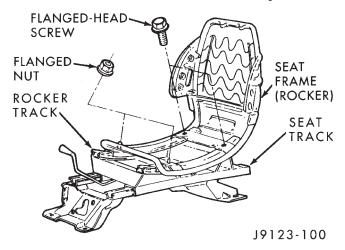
Manual Seat Frame (Rocker) Removal/ Installation
